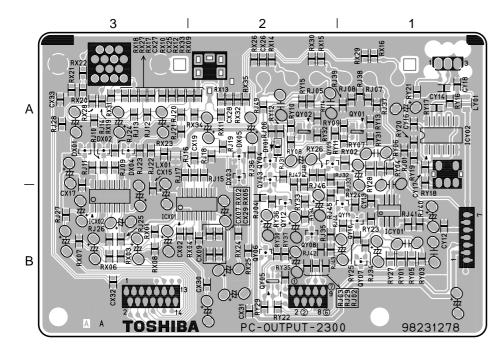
EU05 Output PC Board (Bottom side)
